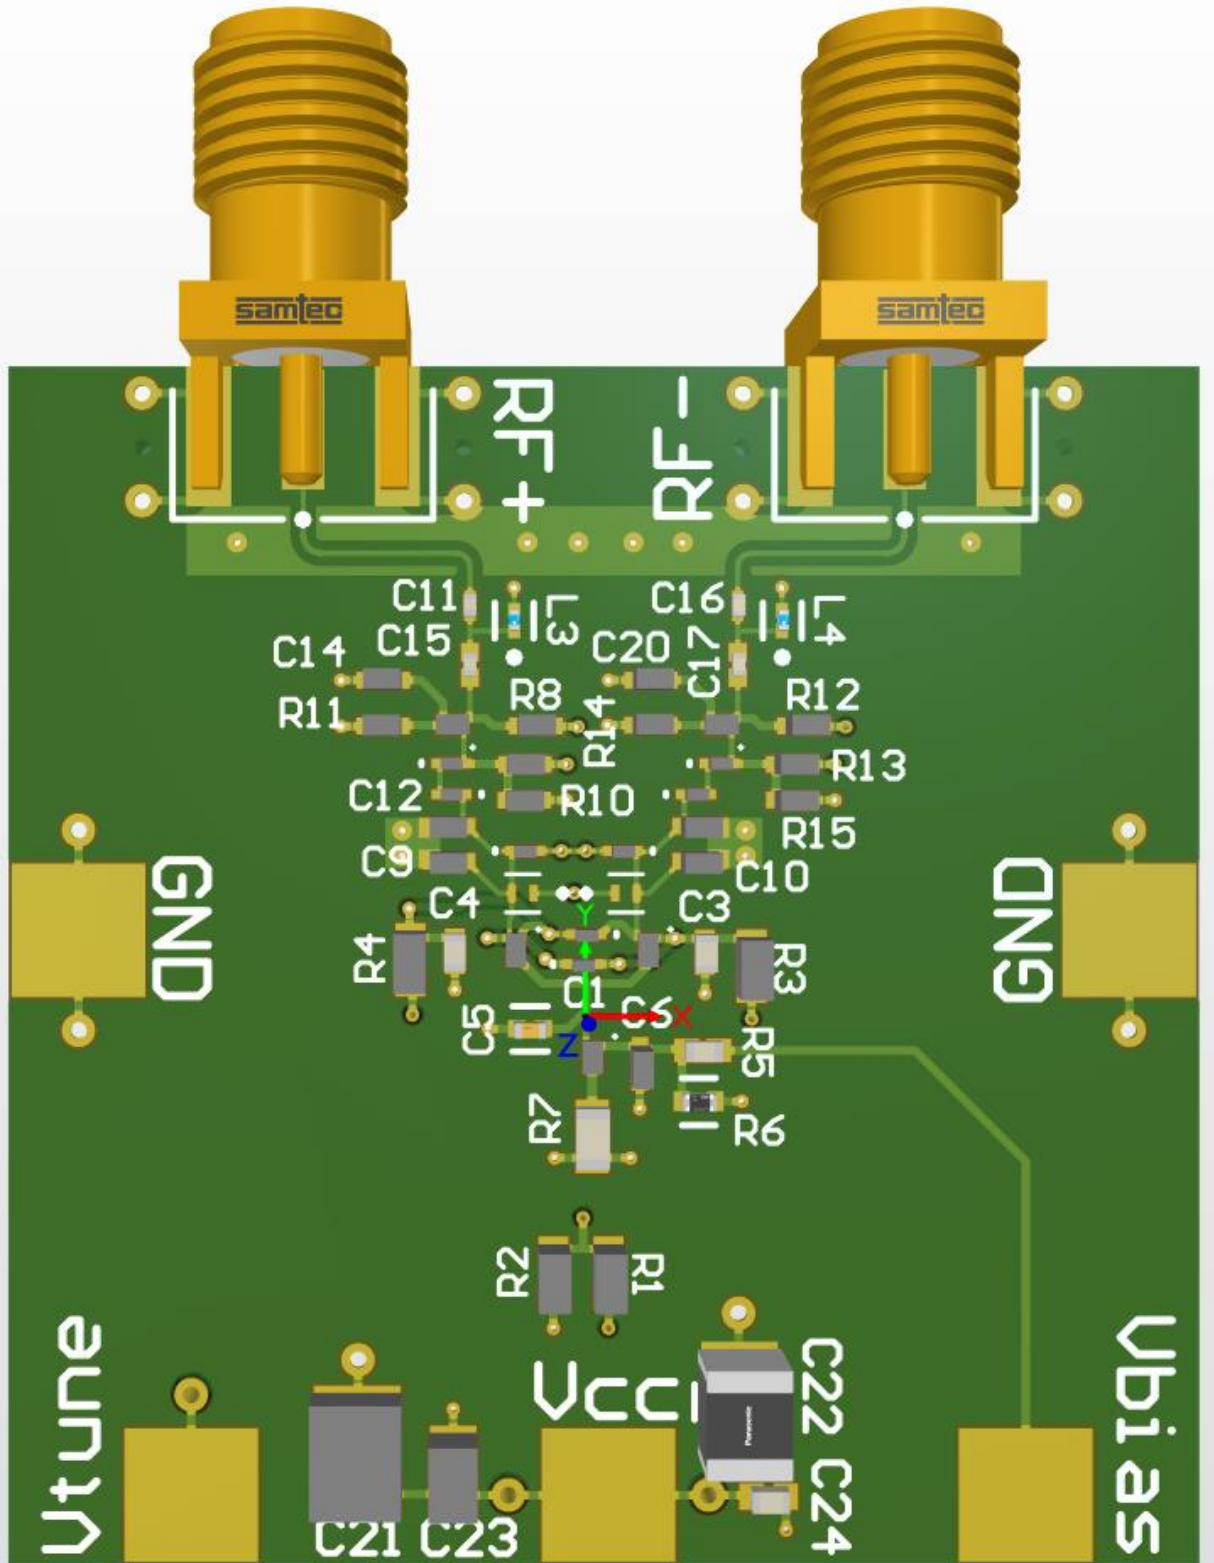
Final VCO Board Layout Design, 3D Top View
